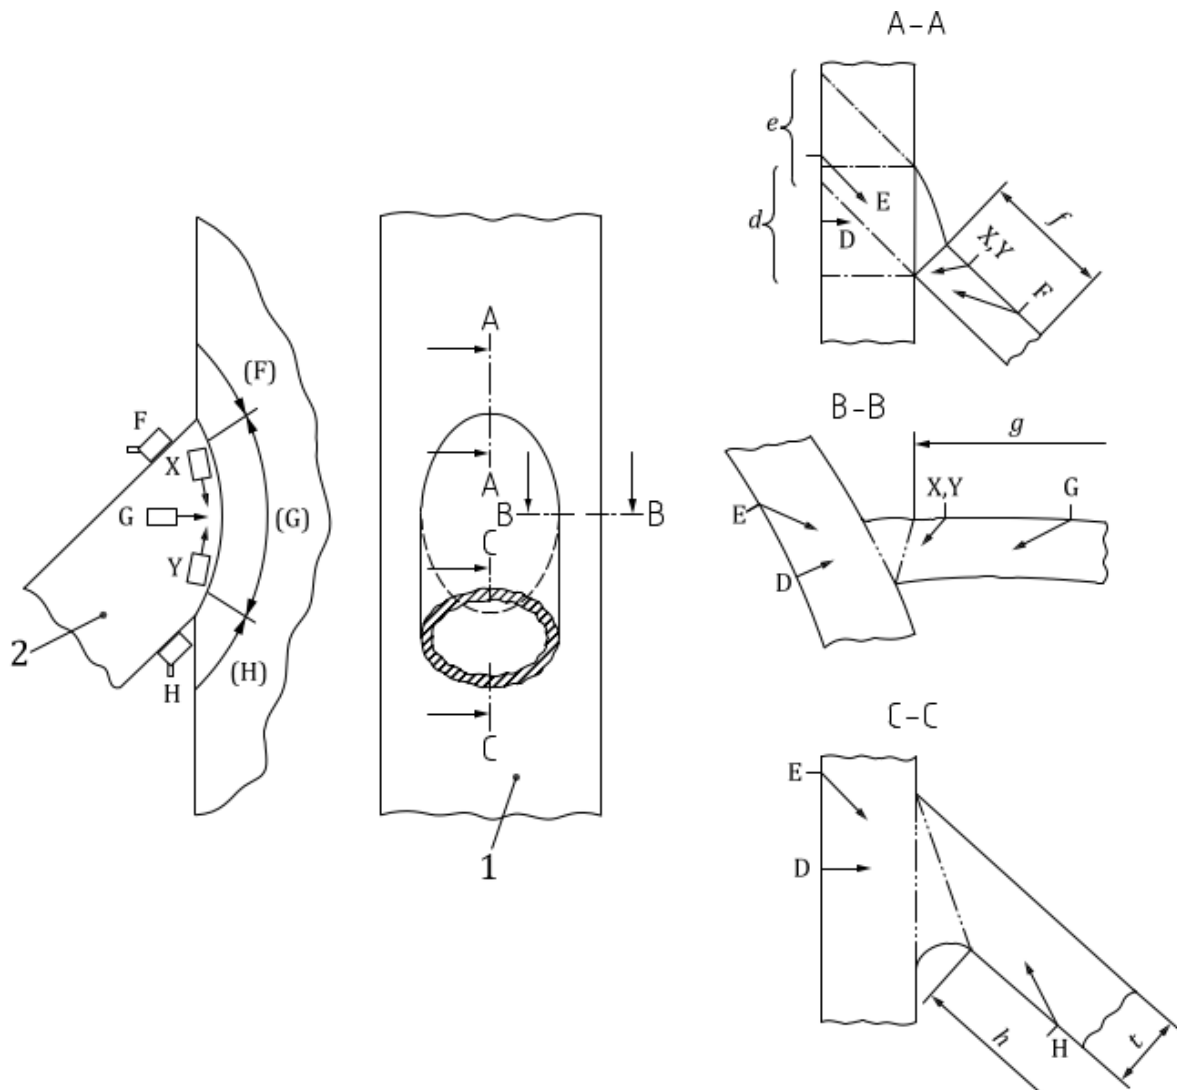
Examples of probe positions for a set-on nozzle joint
